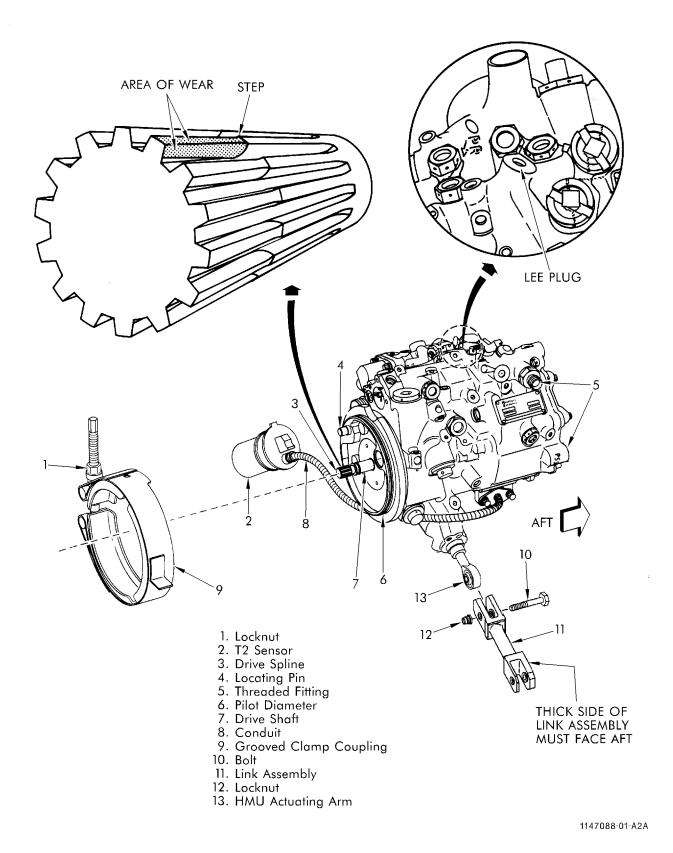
Hydromechanical Control Unit (HMU) and Grooved Clamp Coupling; Inspection
